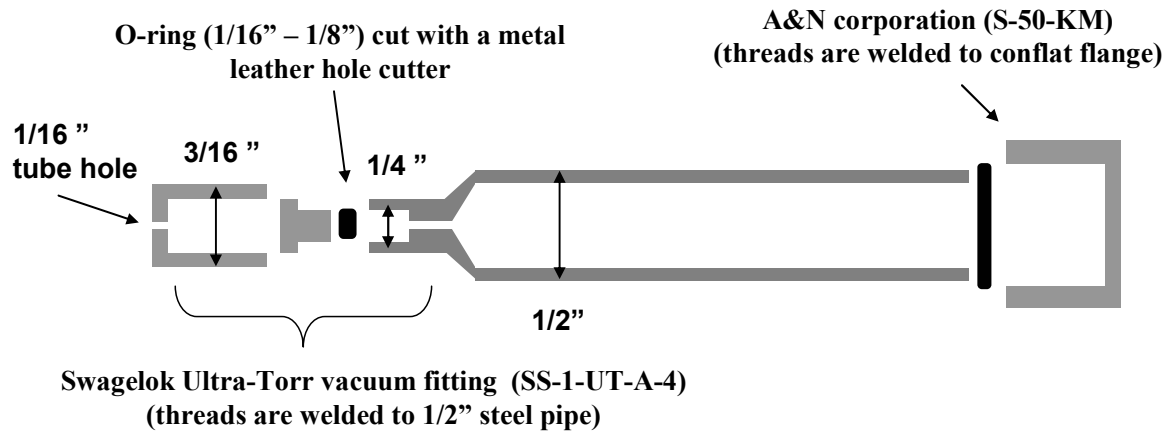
Fiber holder schematic. Several key dimensions are listed along with the part numbers of the threaded components.
